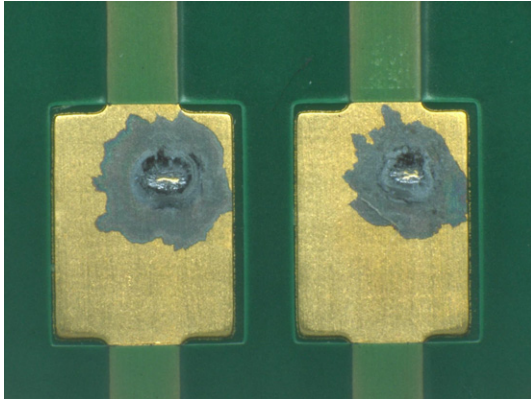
PCB pads of a Ni/Au-flash PCB after corrosive atmosphere test (10 ppm H₂S, 25 °C, 75% RH, 10 days, 15 V bias). Bias indicated next to the contact pads.
